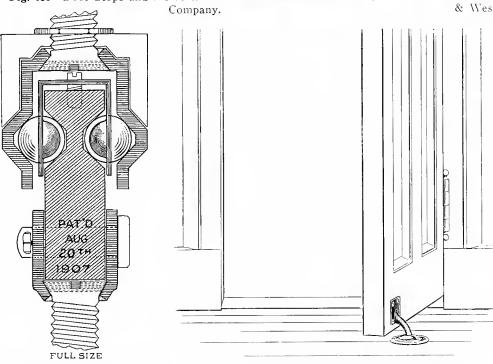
Cross Section of Diamond Tubular Ball Bearing Door Hanger.
